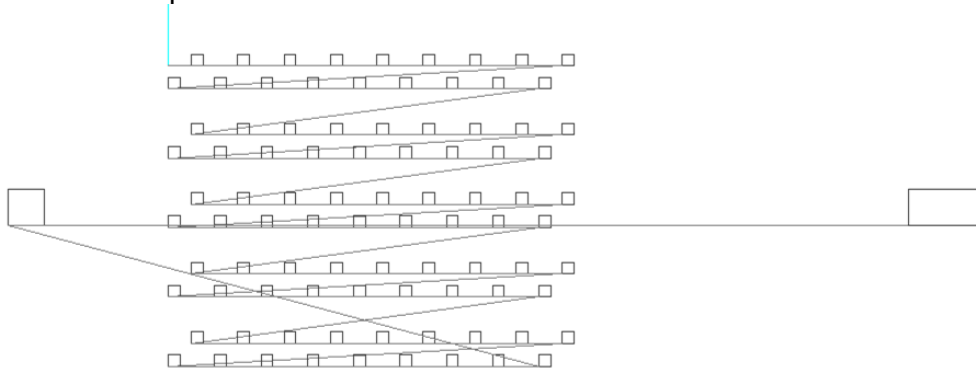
Automated pathway preview of the mill's cutting tool for the full scale top thermoelement template
